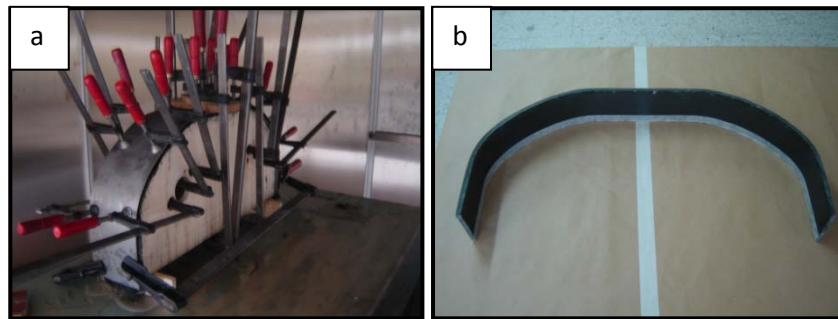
Main landing gear as being cured (a) and as removed from the mold (b)
